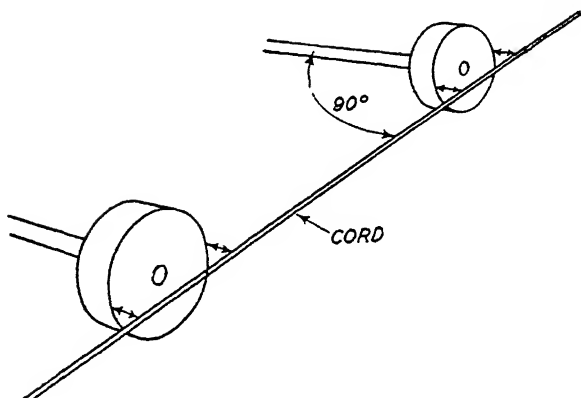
ALIGNING PULLEYS—CORD METHOD
